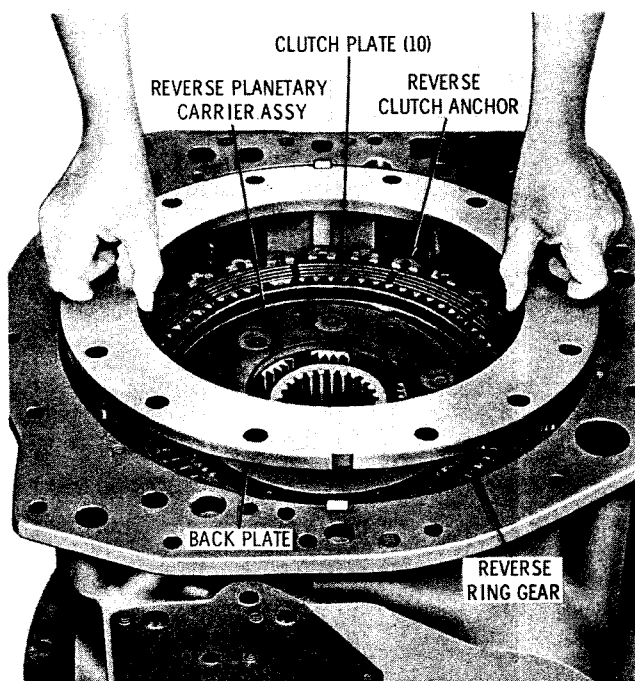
Installing forward-and-reverse clutch back plate (5631 models)
